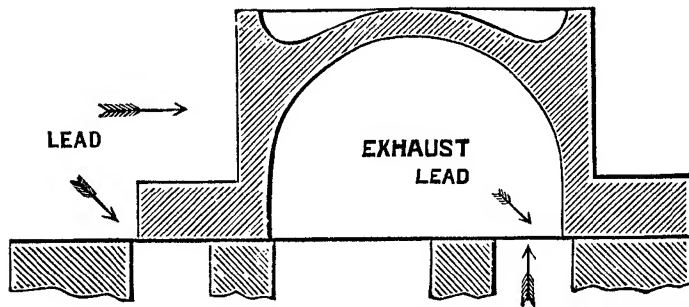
VALVE SHOWING OUTSIDE AND INSIDE LEAD.
